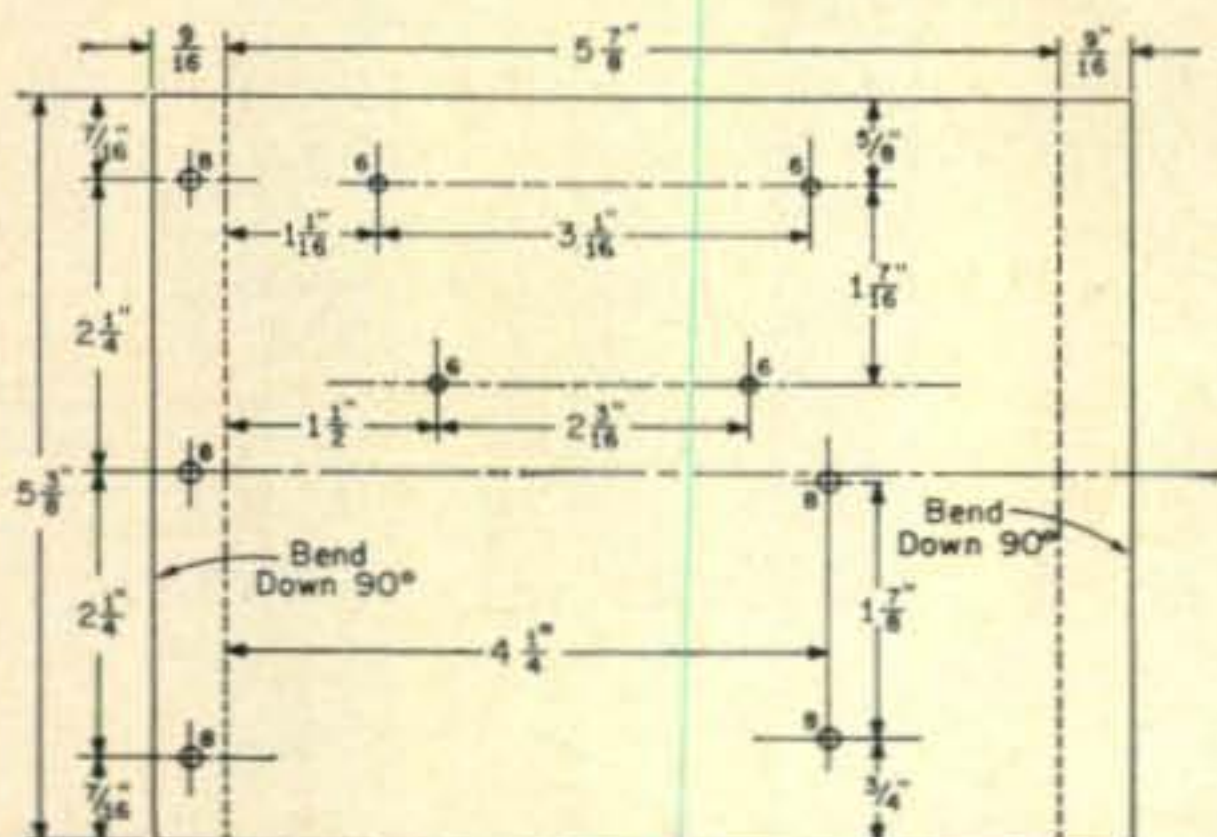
Dimensions, bending and drilling data for the remote chassis.
